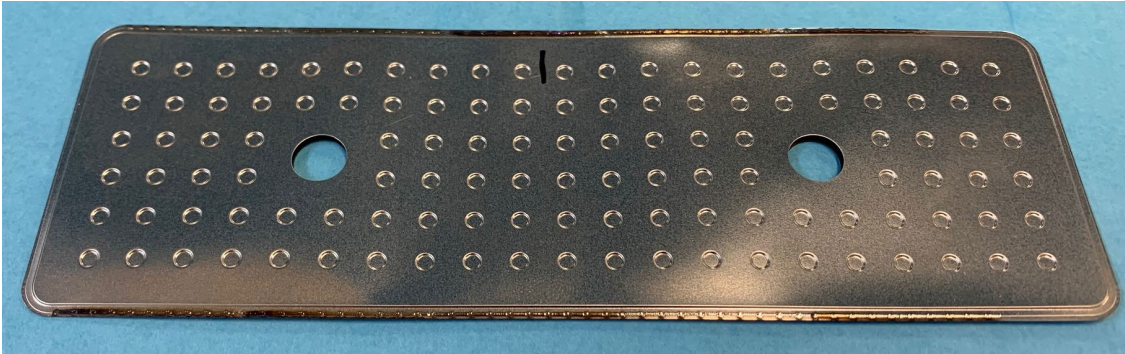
Test Coupon Used for Weld Parameter Investigation
